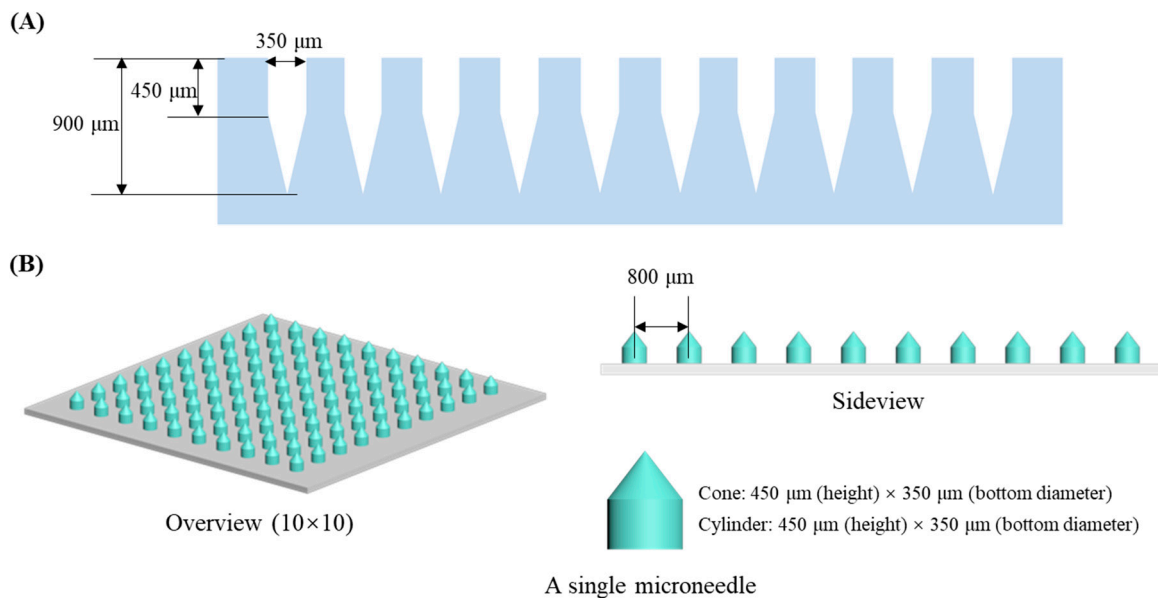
Overview of the designed MN. (A) Side view of the PDMS mold. (B) Master mold.
